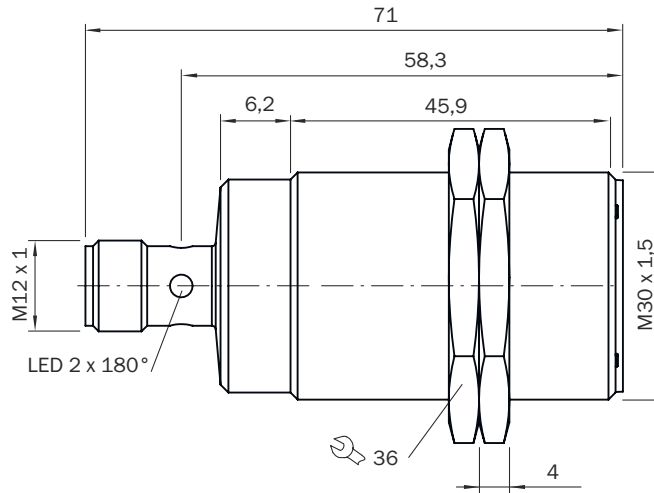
IME2S30-\*\*B\*\*C0 dimensional drawing
